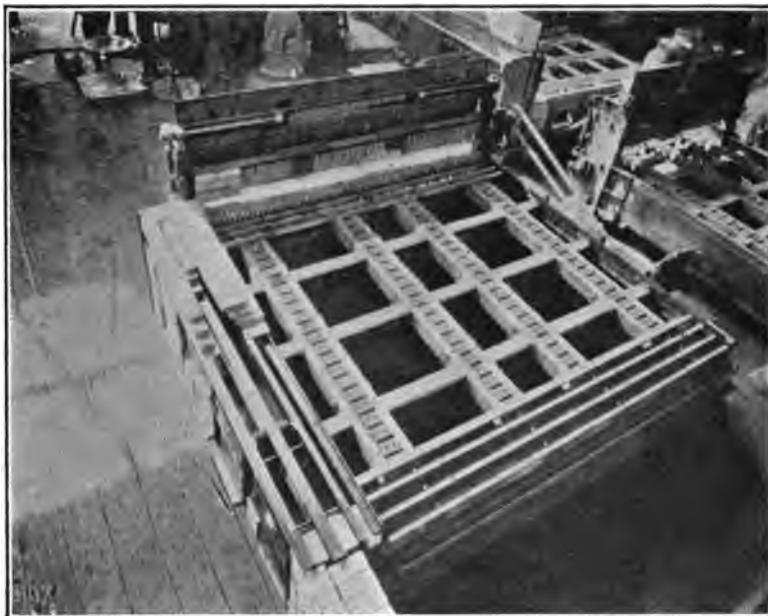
Harrington Forced Draft Traveling Grate Stoker Partly Assembled.
